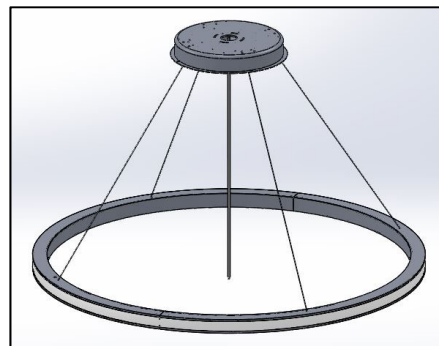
COMPLETED INSTALLATION OF REV PENDANT WITH P1DB HANGING SYSTEM RV2 (OUTER ILLUMINATION SHOWN)
